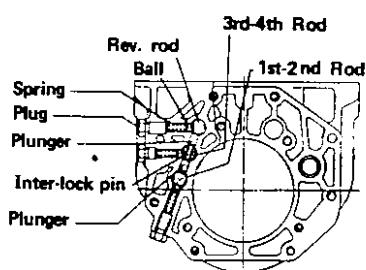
Section through the gearbox showing the interlock mechanism.
